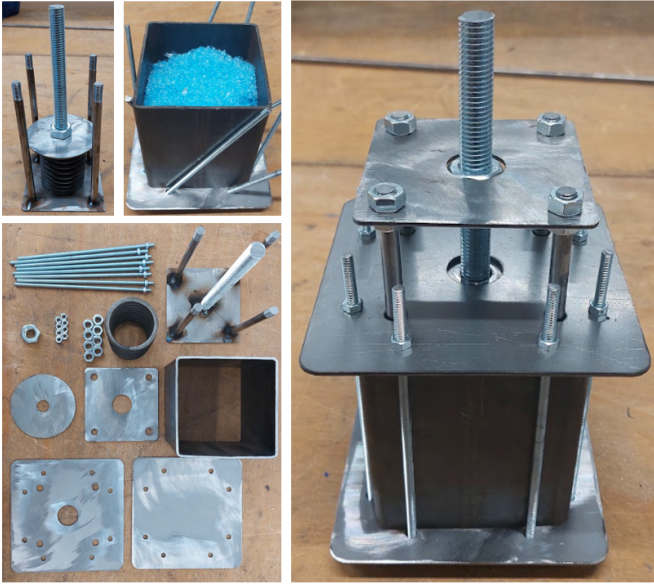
Final Melting Setup with Spring. Top Left: Spring Preloading and 90g of ALP Flakes in the Melting Chamber. Bottom Left: Individual Components Displayed. Right: Fully Assembled Configuration.
